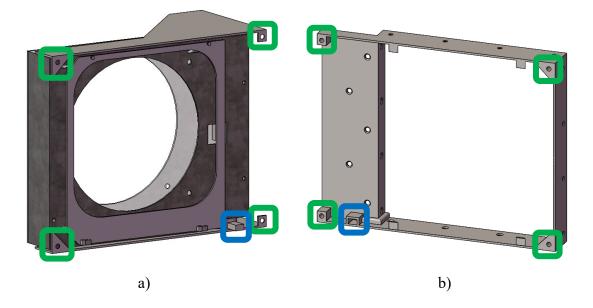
Bolt (green) and electrical connection (blue) locations on the a) modular fan assembly and b) mounting bracket.
